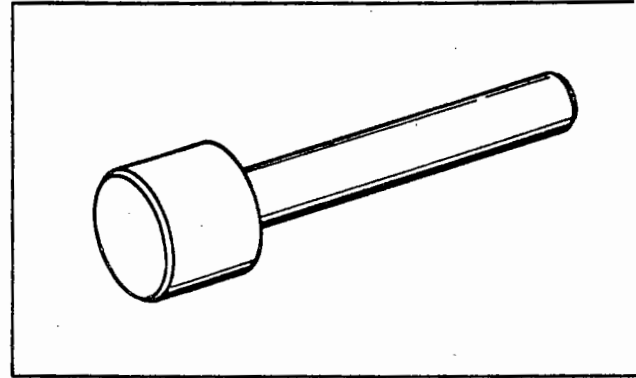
T27277 Throttle Shaft Bushing Arbor Gage
